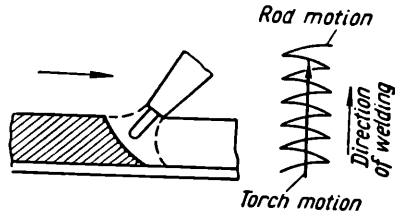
Motions of the torch and welding rod for normal fillet welds
